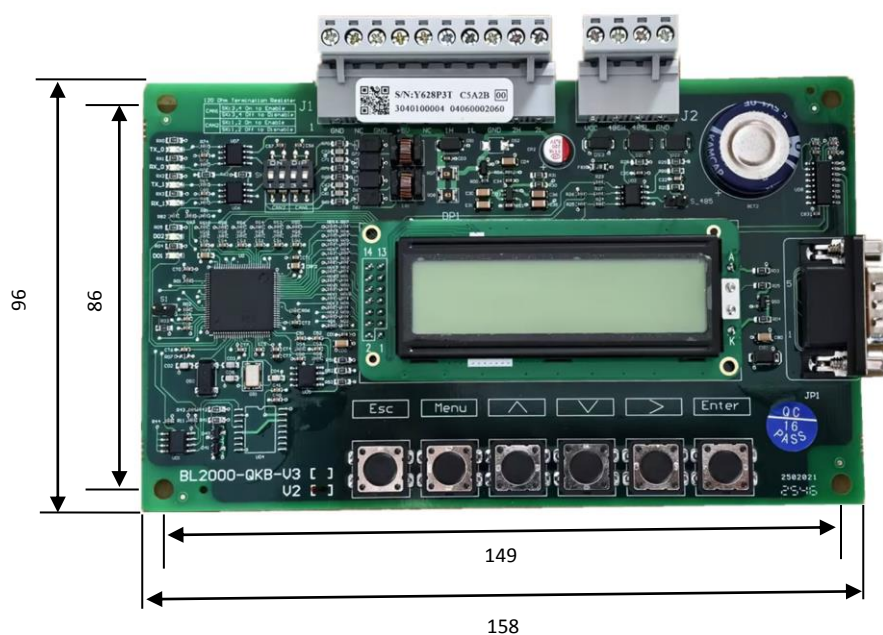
BL2000-QKB-V2 physical and dimensional drawing (Unit: mm)
